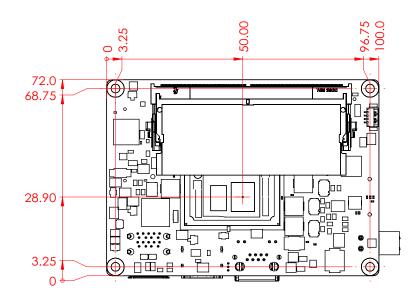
MIO-2364 Mechanical Drawing (Top Side)
